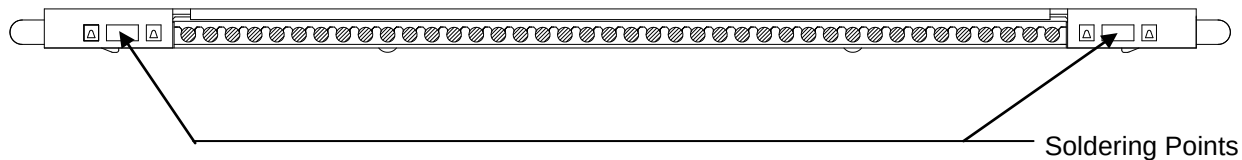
Soldering of UPPER SHELL and LOWER SHELL (VIEW FROM CABLE SIDE)
